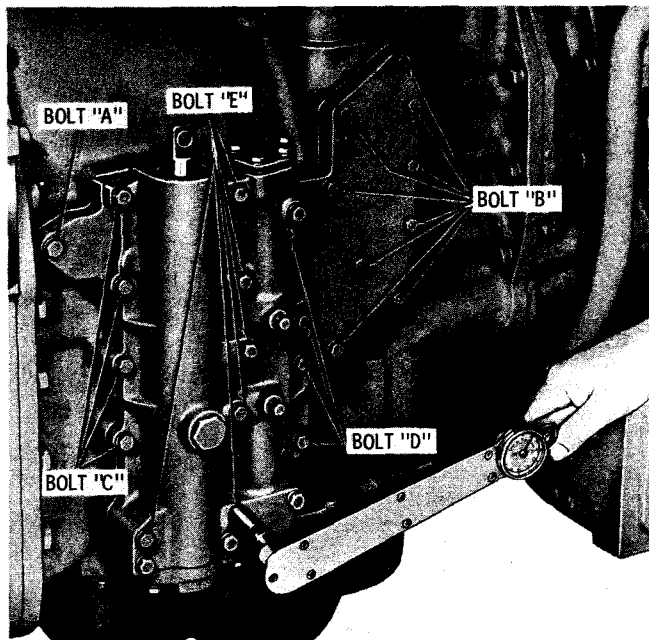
Bolt locations for 6-speed control valve body assembly
